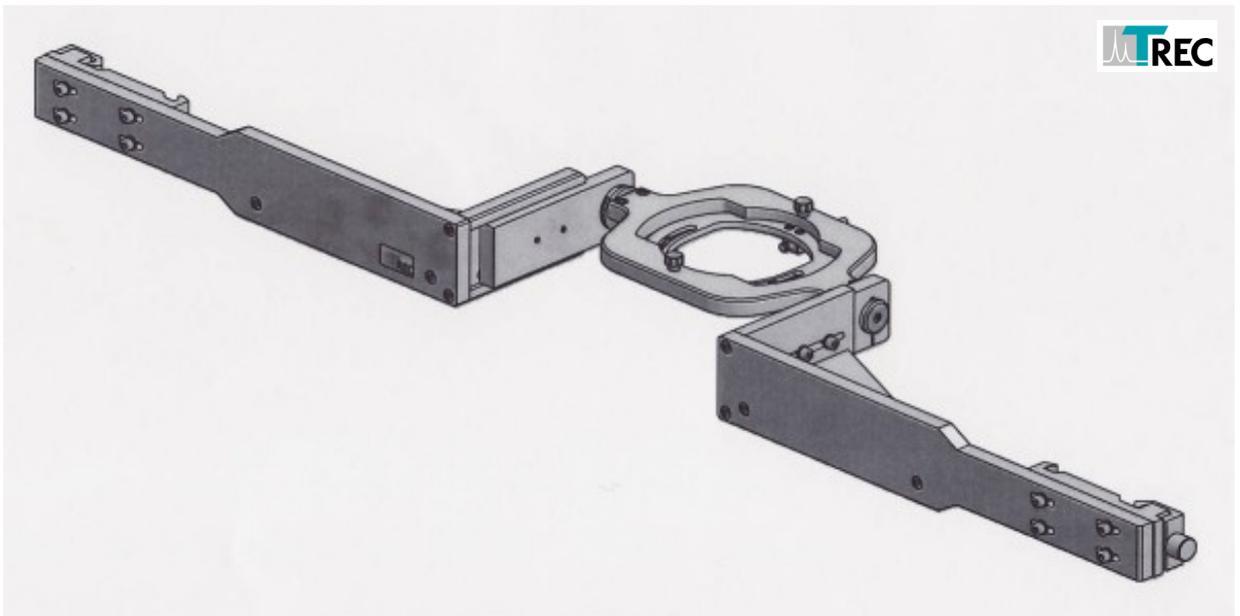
The complete head holder unit ready to be mounted to the PPS frame
